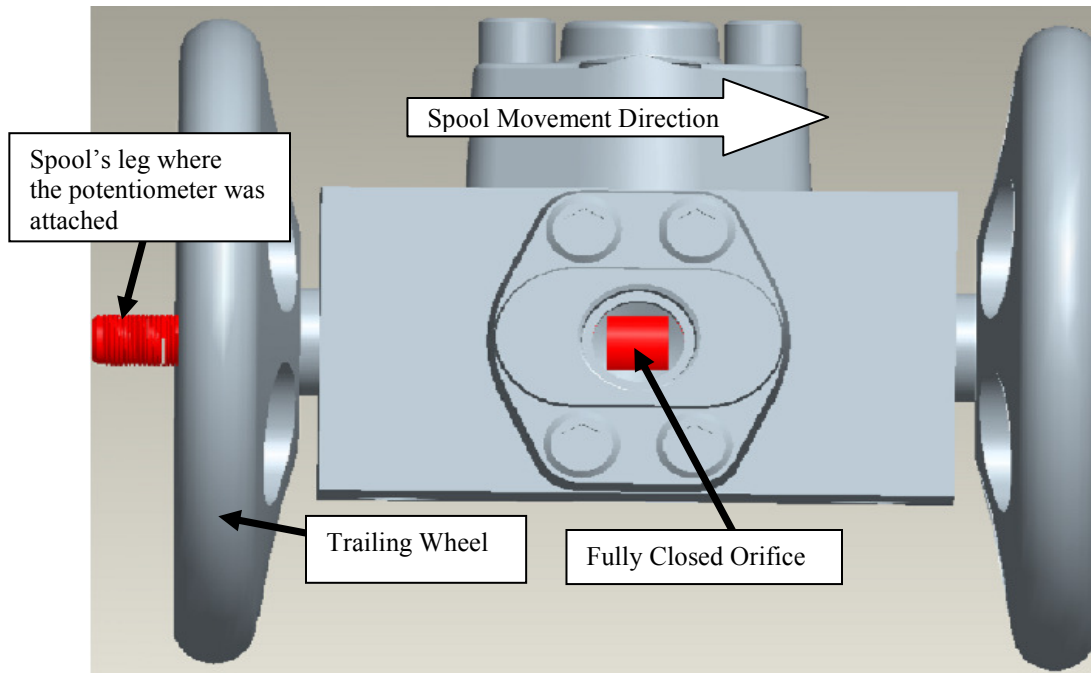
CAD model of the orifice valve assembly (rear view) shows the location of the spool inside the manifold block at the beginning of each sub-experiment of each test.
